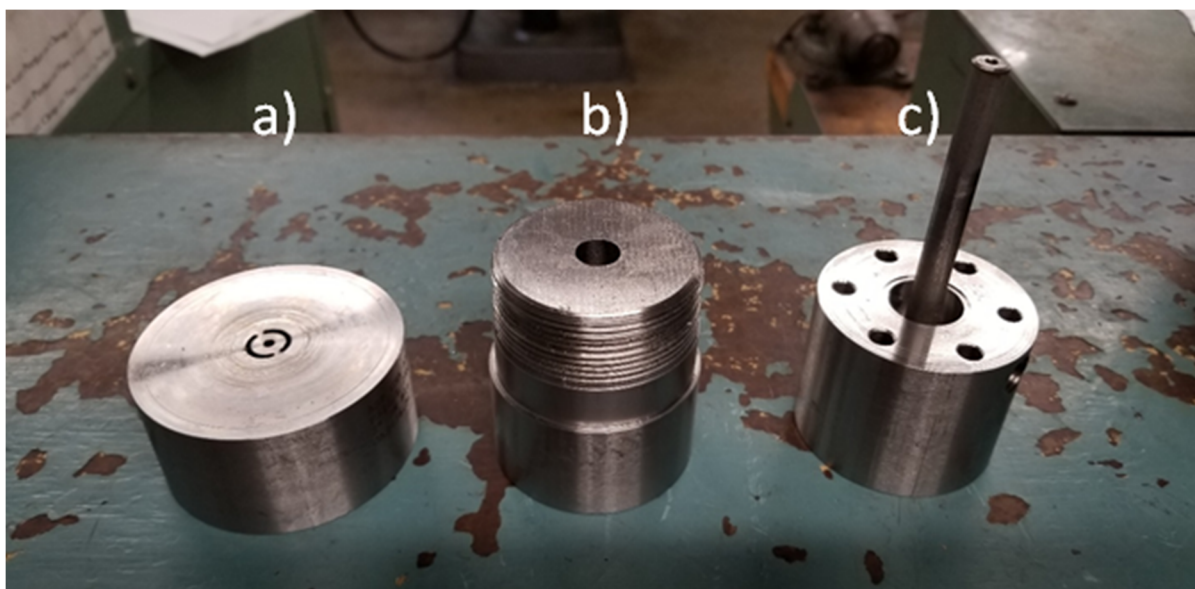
Disassembled premixed gas-phase burner including the top “cap” of the burner (a) the gas mixing chamber section (b) with external threads to mate with the top and the base with the particle feeding tube (c) attached, where the premixed gases enter laterally into the burner.
